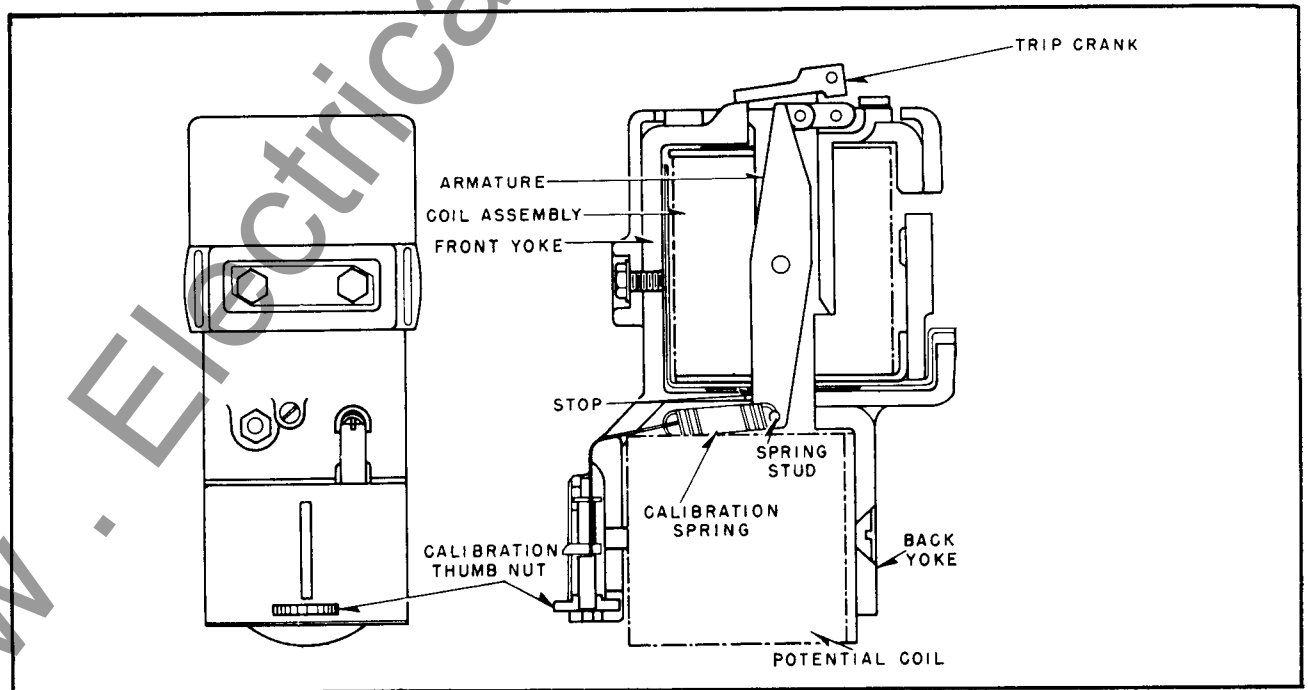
Reverse Current Trip Attachment - Construction Details
